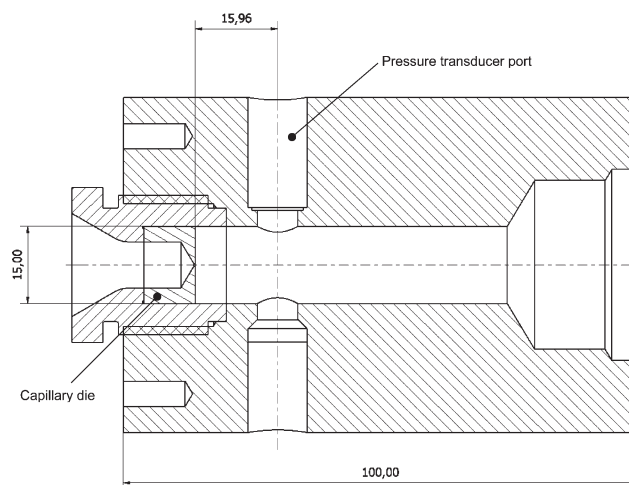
Instrumented nozzle adaptor showing location of pressure transducers and capillary die (dimensions in mm).
